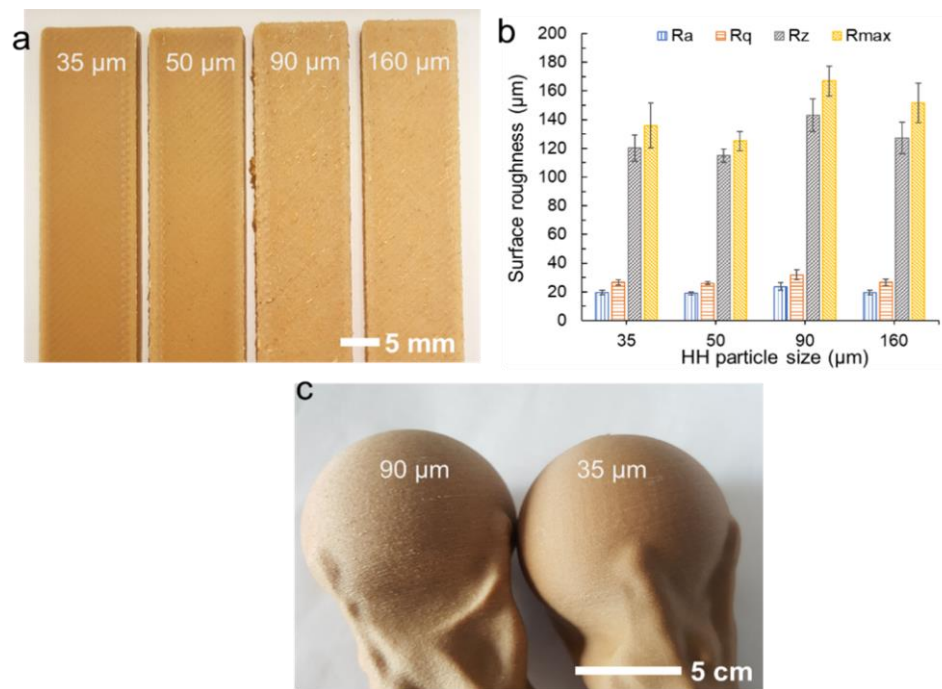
(a) FDM-printed specimens (top view) and (b) surface roughness, and (c) FDM parts.
